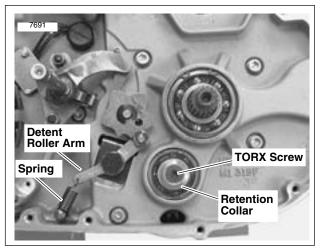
Countershaft Retainer 6-22 2002 Buell P3: Drive/Transmission
